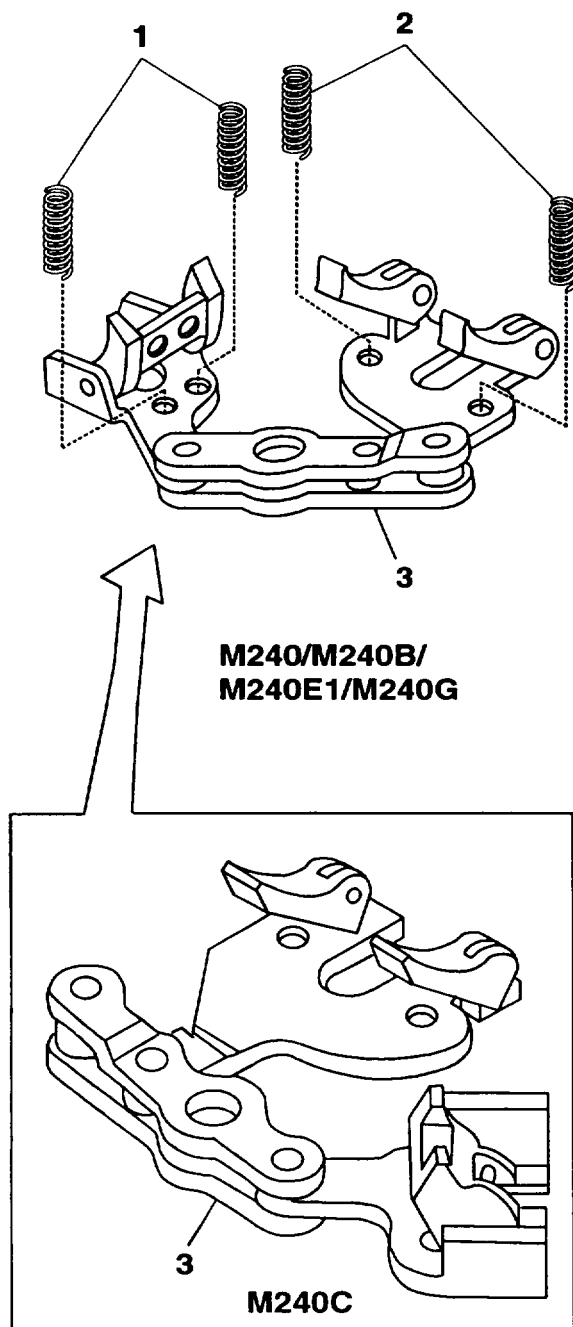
Pawl Assembly, Feed, M240/M240E1, PN 11826177;
